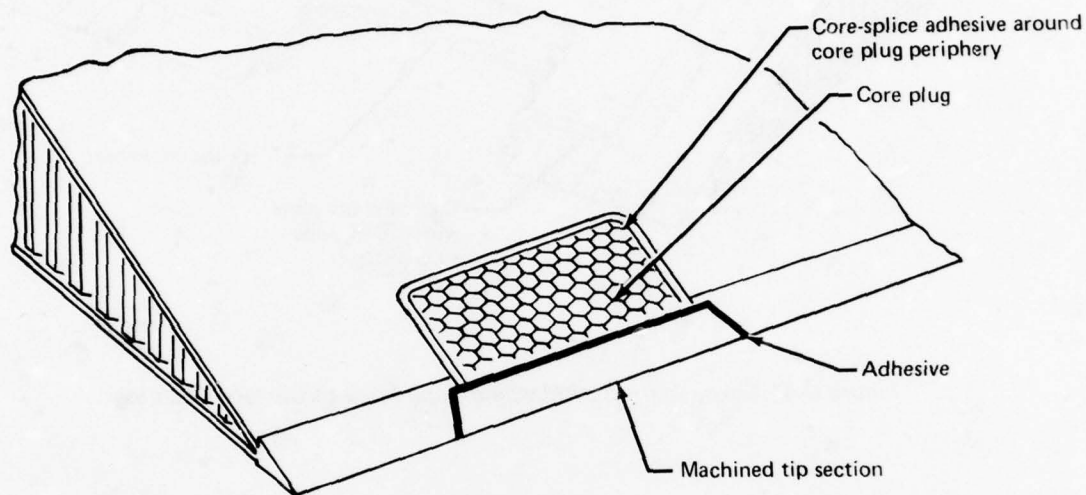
Assembly With Core Plug and Tip Fitting in Place
